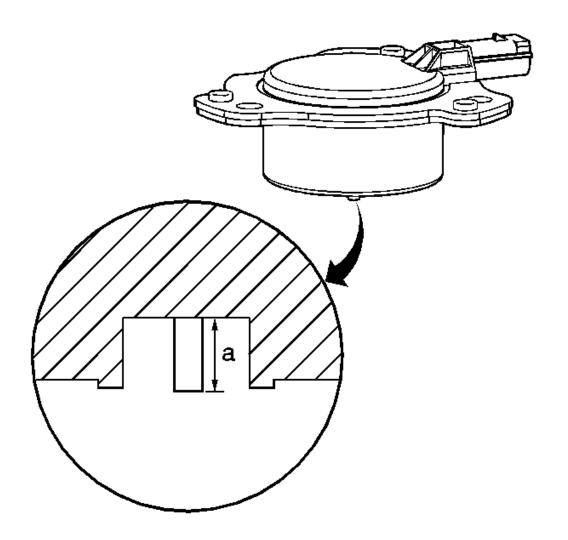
Measuring The Pintle Extended Position Courtesy of GENERAL MOTORS CORP.
